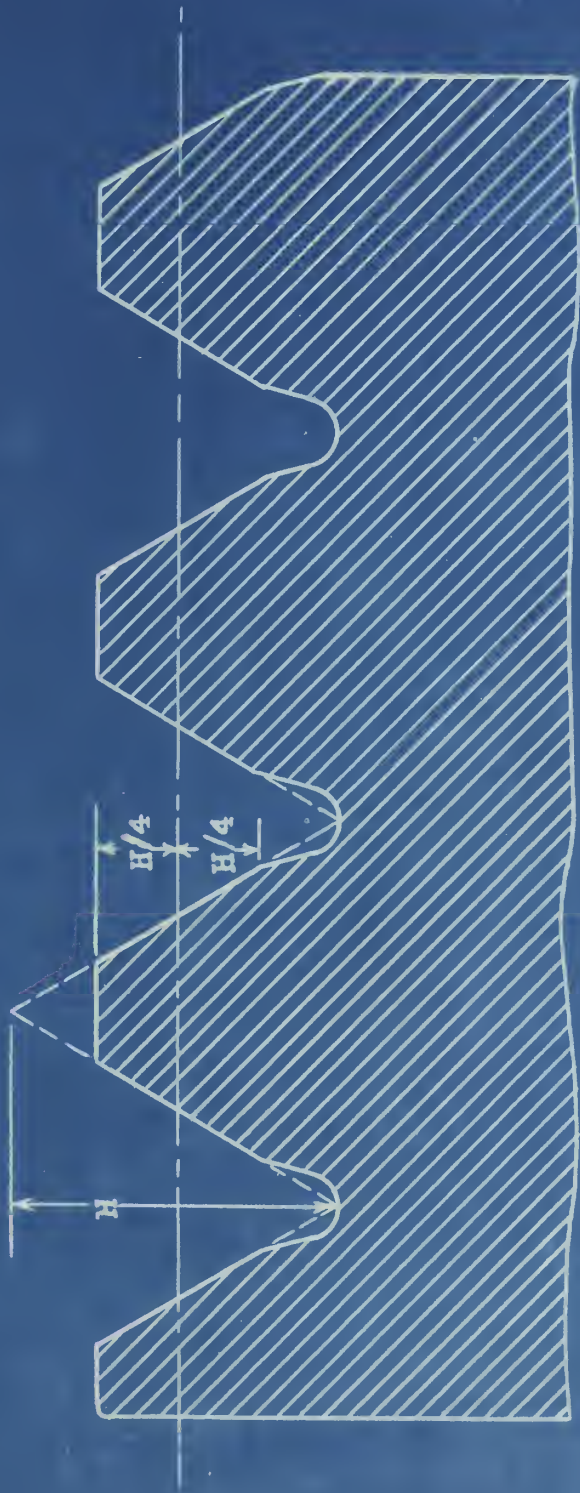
Recommended Thread Form for "Not Go" Thread Gages
